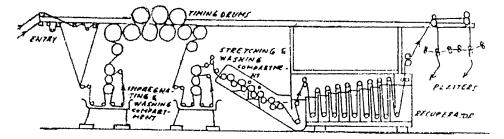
Chainless mercerizing machine (Courtesy of Benninger AG).
